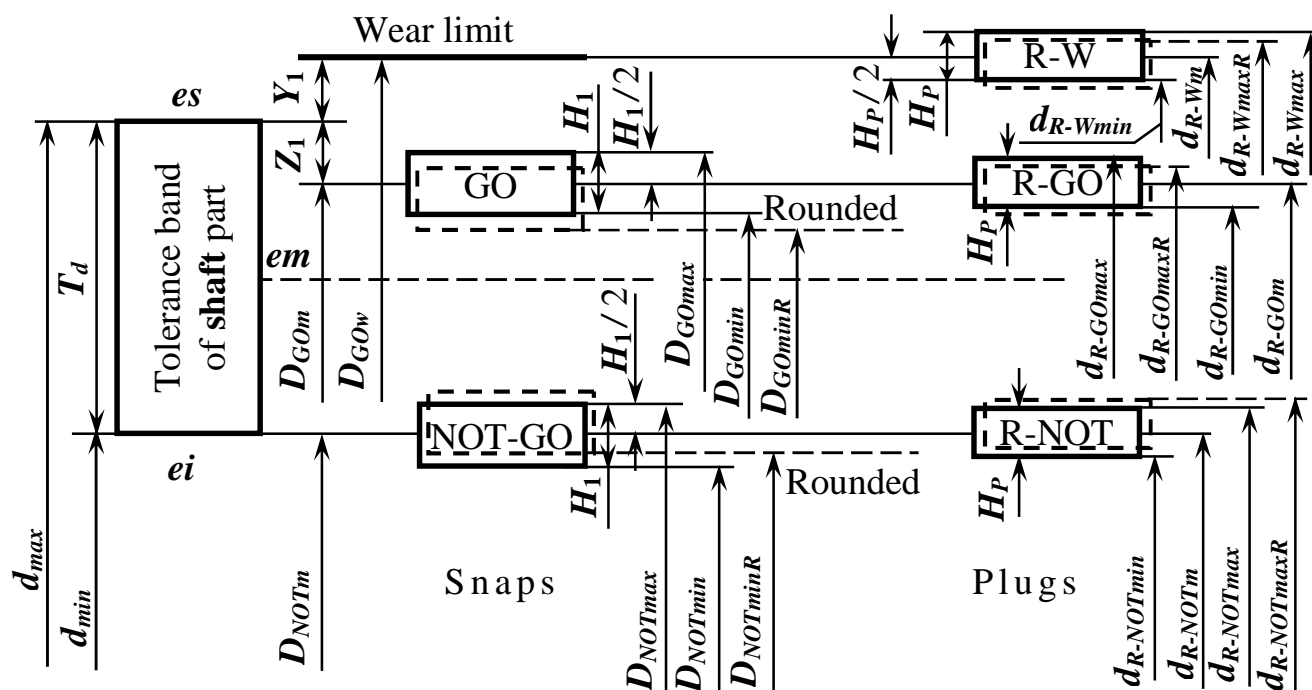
Diagram for calculations of dimensions of work snap and ring gauges for check of hole part and reference plug gauges for check of work gauges
